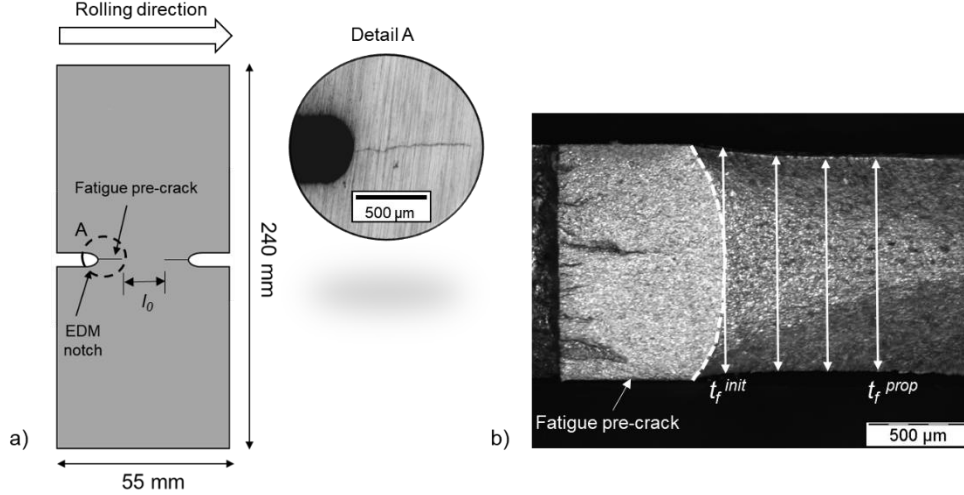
a) DENT specimen used for EWF tests and detail of the fatigue pre-crack at the notch root. b) Fracture surface of a DENT specimen and location of the different thickness measurements. The dashed line indicates the crack tip.
